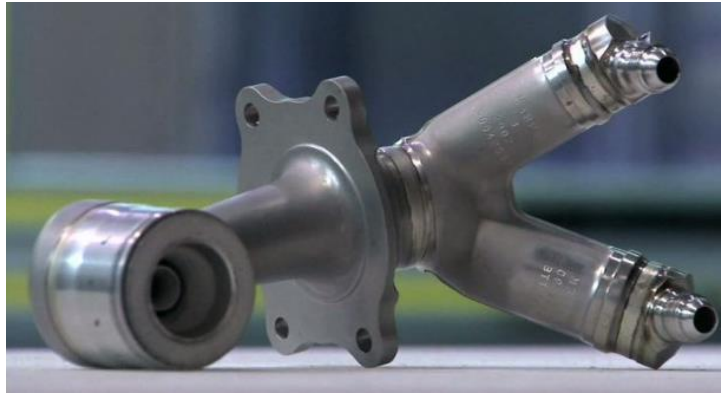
3D Printer engine fuel nozzle used for the LEAP-1C jet engine [34]
